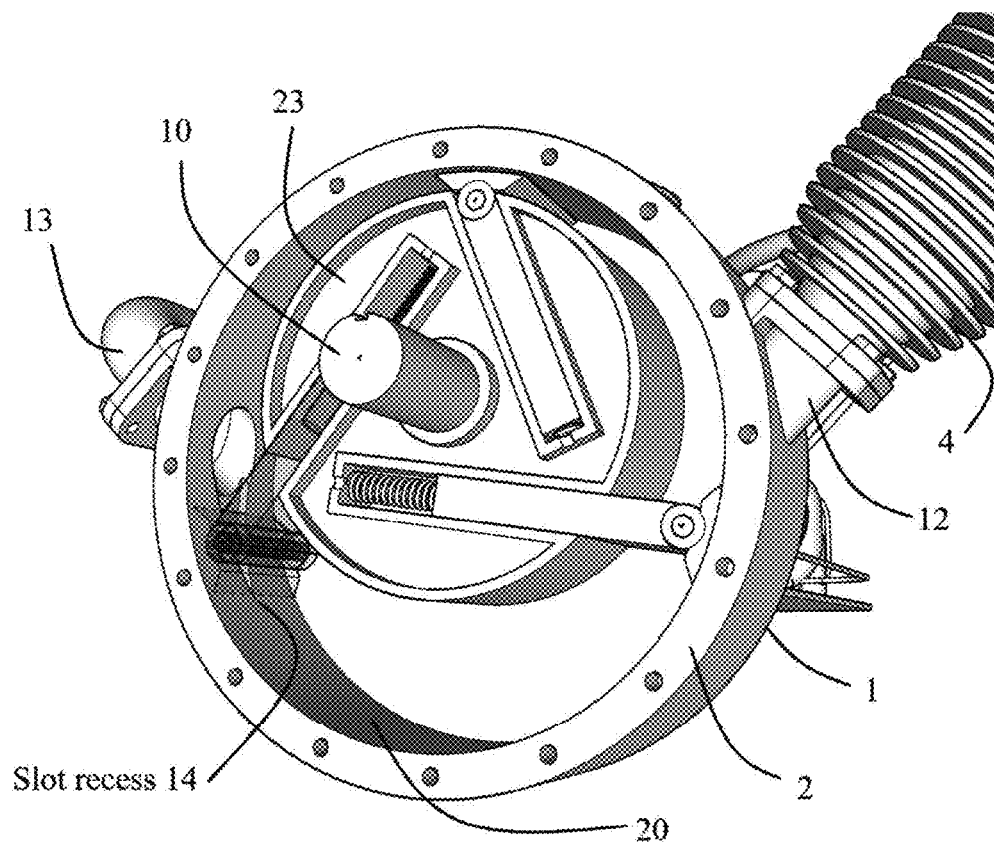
Vane rotary type motor casing showing the gradual discharge recess near the exhaust port, vane drawn transparent.
